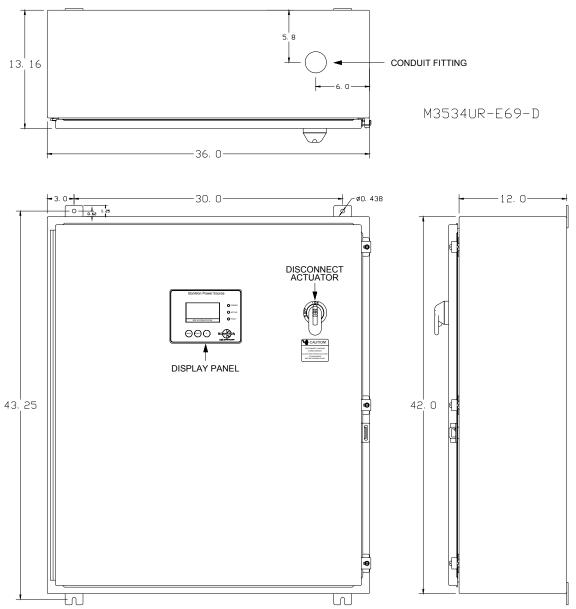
M3534UR E69-D Cabinet Dimensional Outline
